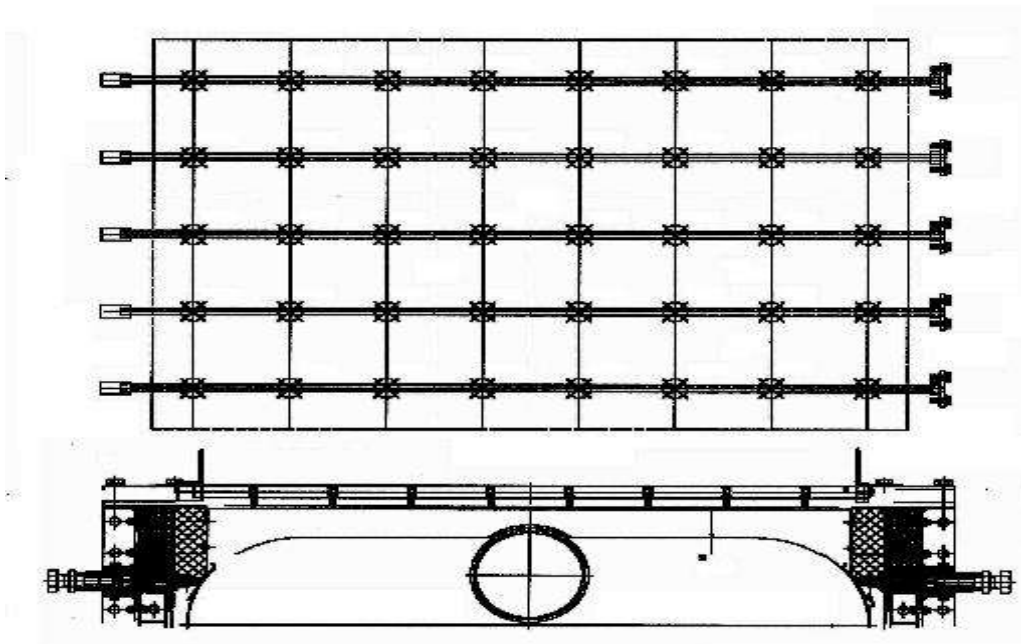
Temperature measurement positions on the heat exchanger. Top view above and side view below.
